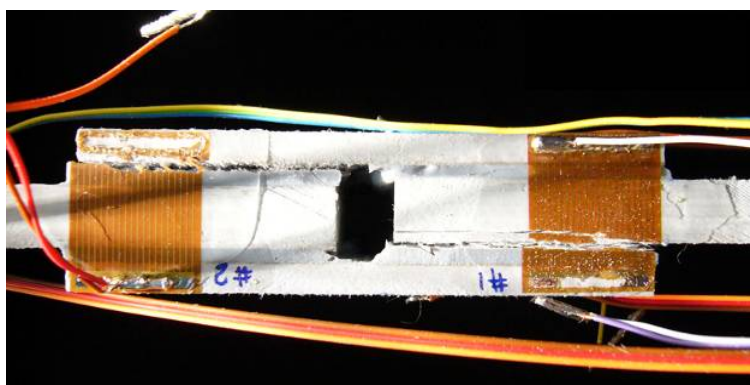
Typical failure mode of DLJs (also showing crack gages).
